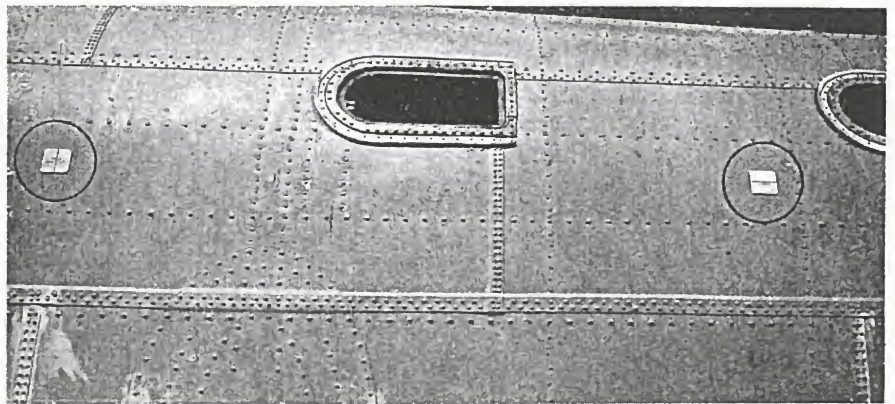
DATUM-MARK PLATES ON OUTSIDE OF HULL
